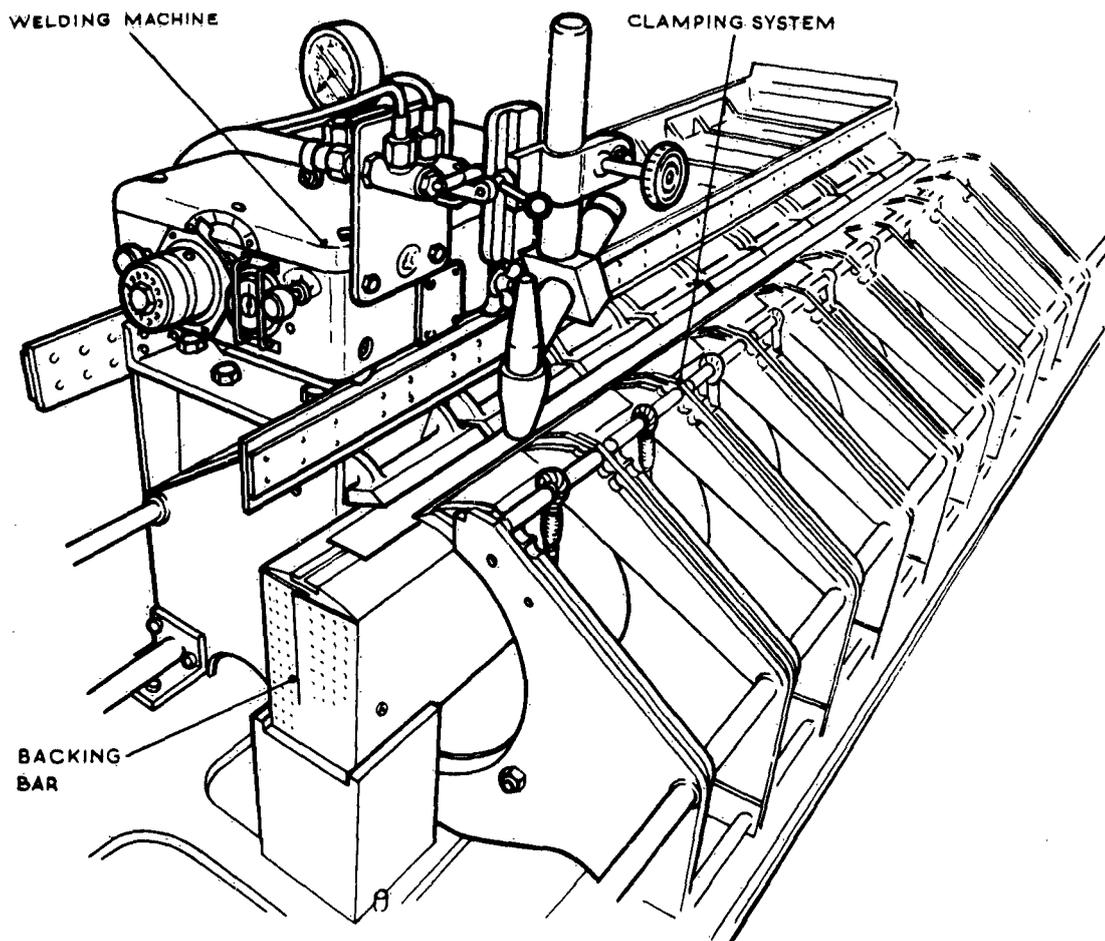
Machine used for longitudinal welding of medium weight tubes
